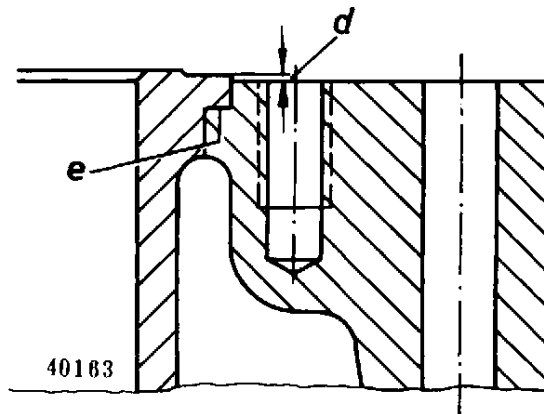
Upper Fit and Sealing Face of Cylinder Liner in Cylinder Block
